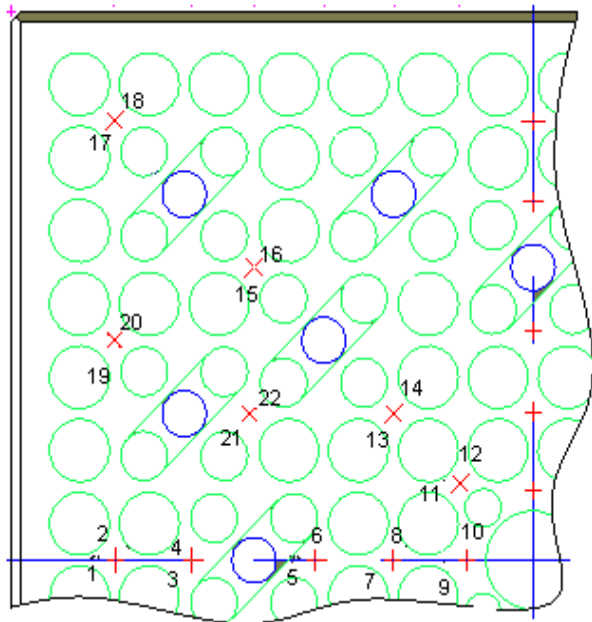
Arrangement and orientation of the gauges on test specimen.
